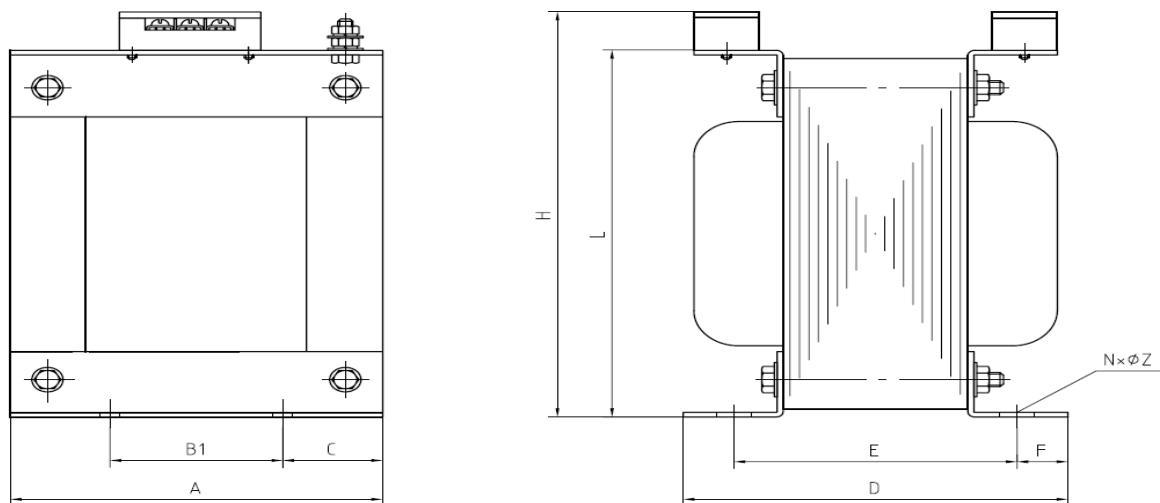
Appearance dimension of BD single-phase insulation transformer
